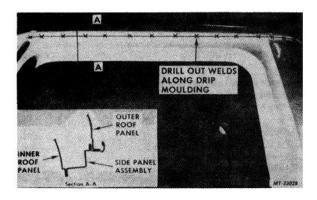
Side Panel to Outer Roof Panel Spot Welds
